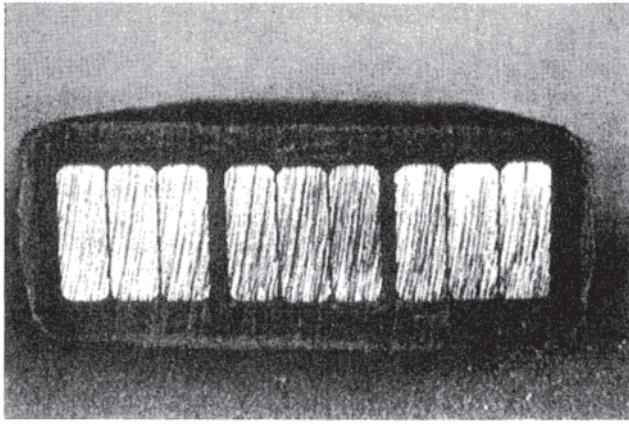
A form-wound, multiturn, diamond-shaped motor stator winding coil.
